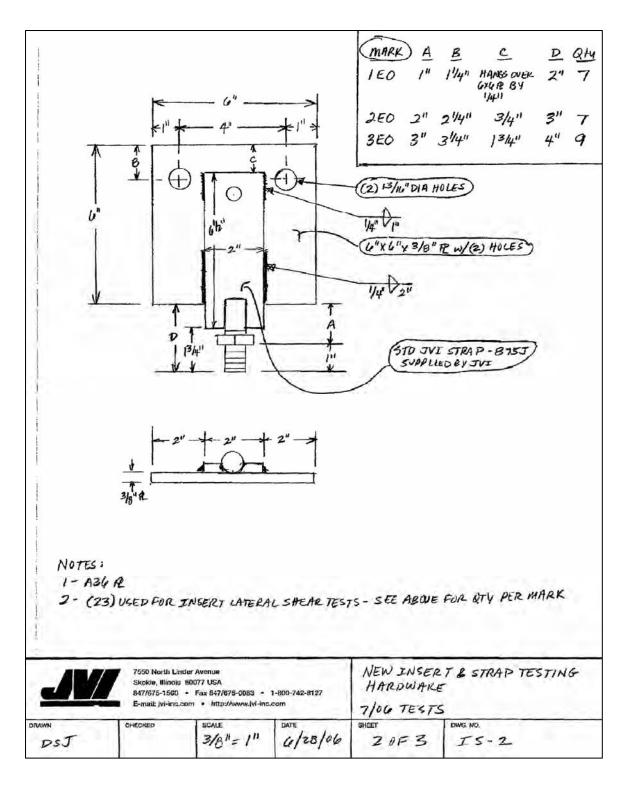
Production detail for standard strap and rod assembly with load plate for shear tests.
